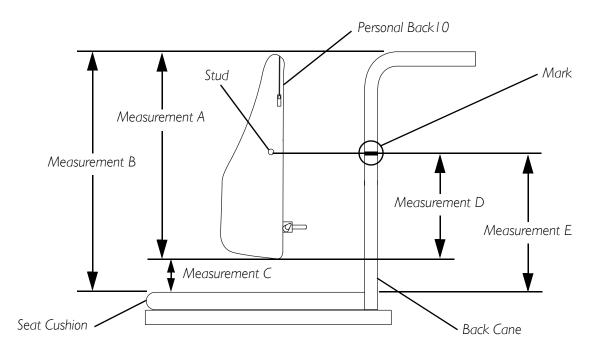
DETERMINING PERSONAL BACK 10 MOUNTING POSITION
